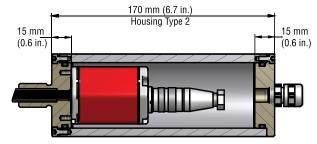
Model RS Rod-style sensor dimension reference (shown with Type 2 housing)
